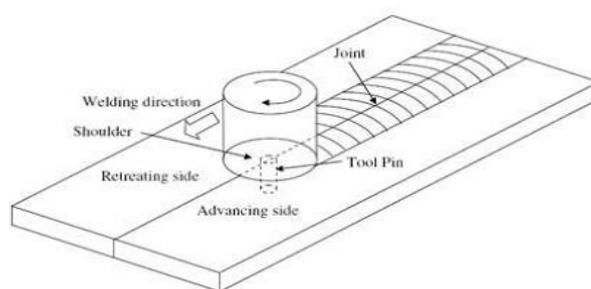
Schematic drawing of friction stir welding [1]
